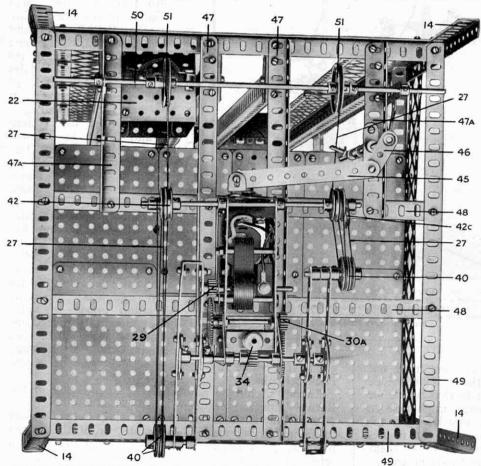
Plan view of the Top Floor of the Warehouse, showing the arrangement of the mechanism.
